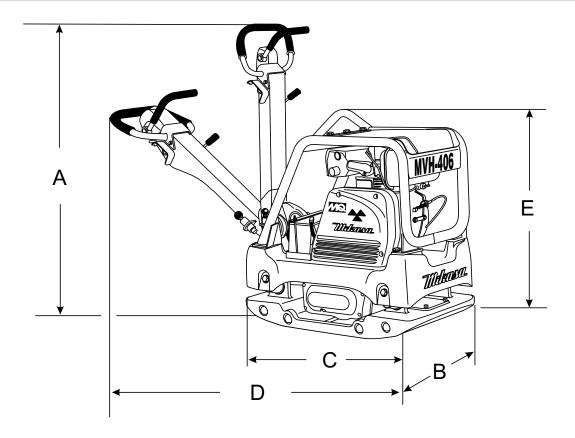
MVH406DSZ/DSCPAS Reversible Plate Compactor Dimensions
